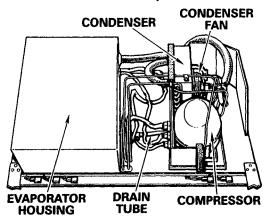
ZIS36,42,48 N & D's Condenser Fan (DMG0058, DMG0059, DMG0060, DMG0061)
